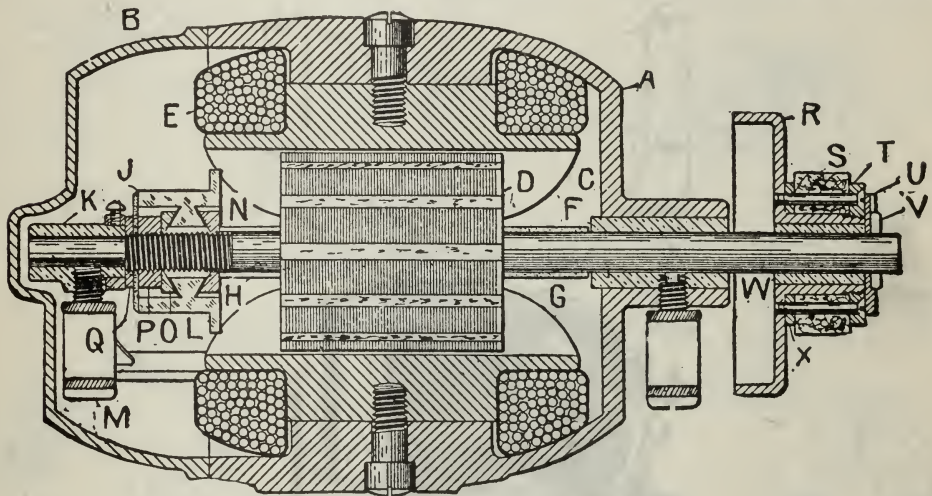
,951.—Sectional diagram of the Apple igniting dynamo. The parts shown are: A, cast iron body containing the moving parts; B, the hinged lid of the body; C, the one pole piece of one of the field magnets; F, brass bearing of the armature spindle; G and H, fibre tubes surrounding the spindle; K, brass spider supporting the spindle; L, commutator; M, wick feed oil cup; N, beveled nut supporting the commutator; O, P, Q, supports of the commutator; R, the driving disc; S, lever friction pinion. This machine can generate a direct current at 8 volts at a speed of between 1,000 and 1,200 revolutions per minute. It is provided with a simple centrifugal governor that automatically interrupts the driving connections when a certain speed has been exceeded.
